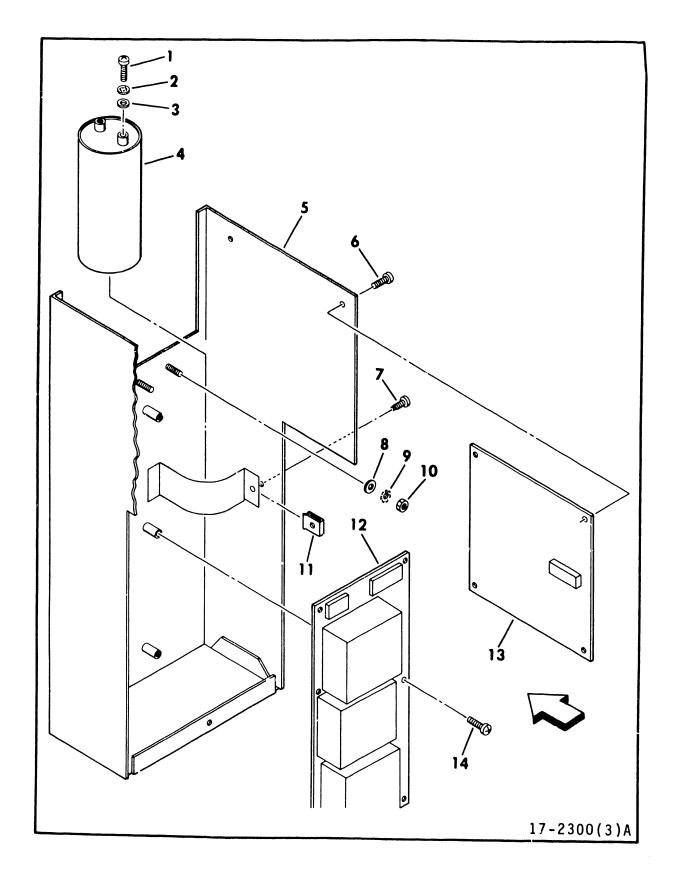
A-23. AC Power Supply Assembly (Sheet 3)
